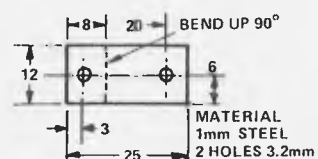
The brackets used to support the preamp and power supply boards. 4 required.
